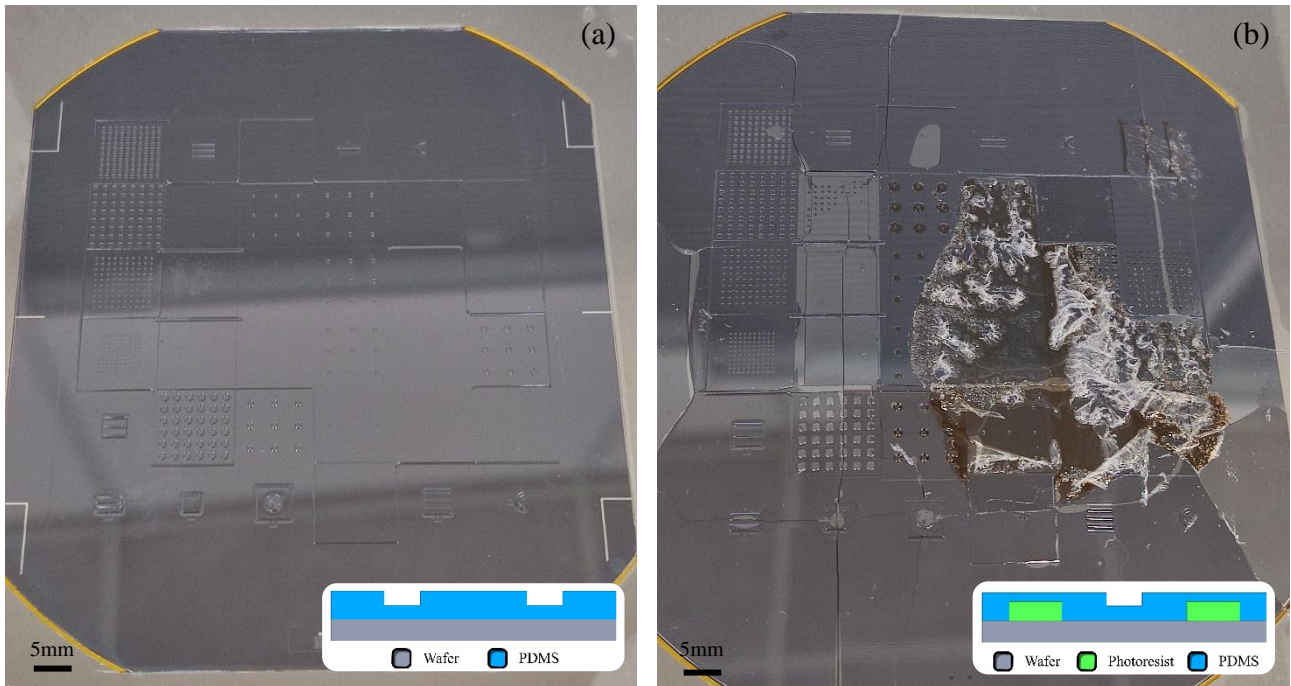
(a) Injection moulded PDMS on a flat silicon wafer visualizing the pattern of the top mould. (b) Injection moulded PDMS on the photoresist wafer mould, visualizing the pattern of the top mould. The wafer shattered under the pressure of the procedure. PDMS cured poorly on the photoresist structures. A schematic cross-section is included for both samples.
